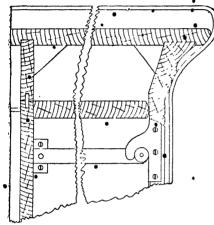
Enlarged Section through Upper Part of Sectional Bookcase.
